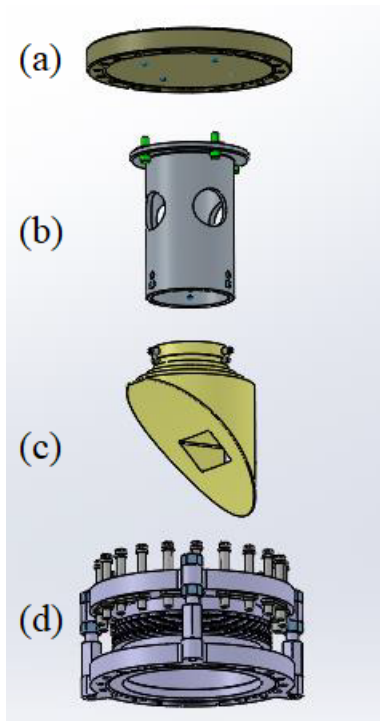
Exploded view of mirror assembly principal components [14]. (a) Mirror holder flange. (b) Mirror holder. (c) Toroidal mirror with rectangular clear aperture. (d) Vacuum bellows.
